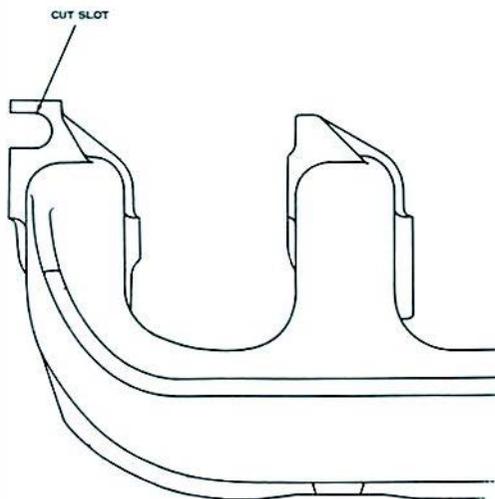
CUTTING SLOT IN SIX CYLINDER EXHAUST MANIFOLD END BOSSES
